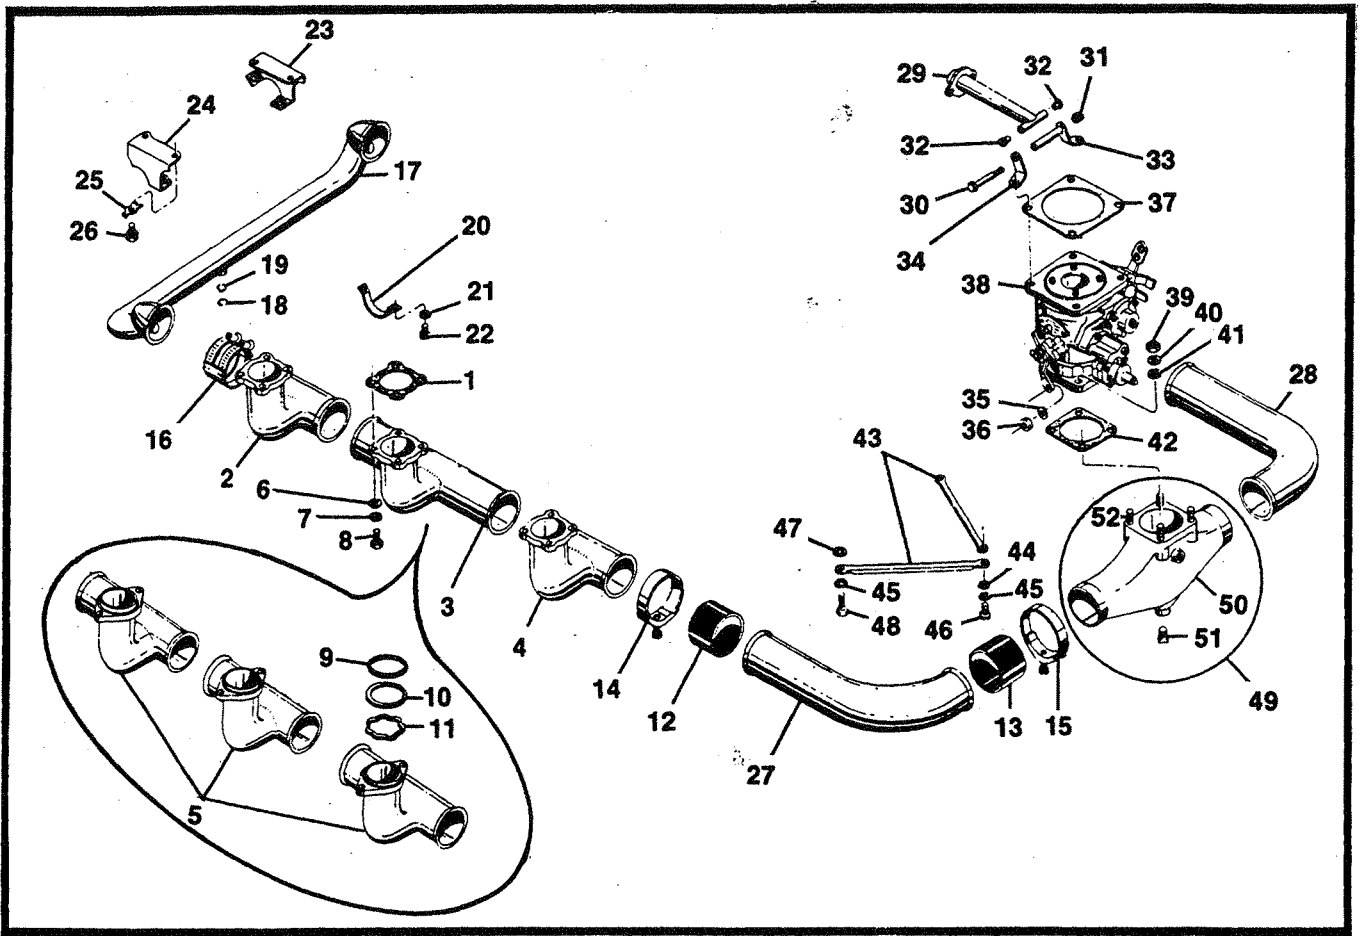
B. CARBURETOR AND INDUCTION SYSTEM MODELS O-470-B,E,M.
